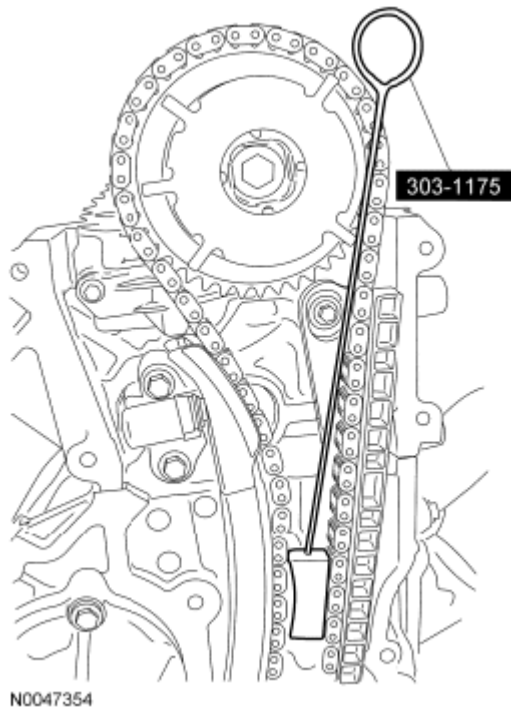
Identifying Timing Chain Locking Tool In Timing Chain
